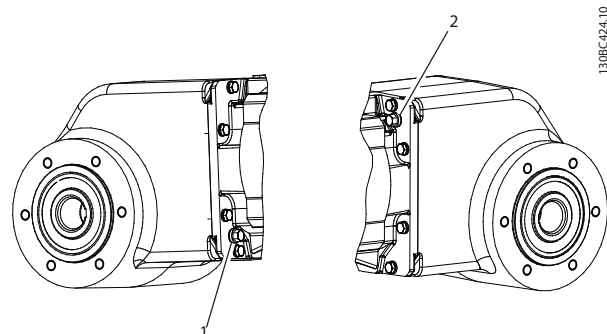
OneGearDrive Oil Screws 1 and 2
